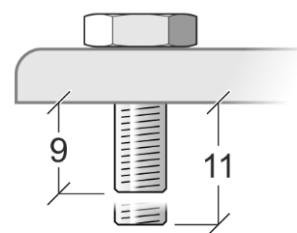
Min./max. bolt protrusion into fixture base (millimeters)
